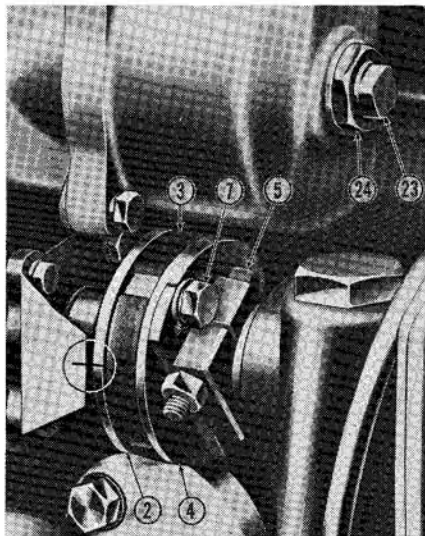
View showing timing mark on fuel injection pump drive coupling flange (2) aligned with mark on timing plate (both marks are circled). If necessary to adjust timing, loosen the two cap screws (7) and rotate pump camshaft.
